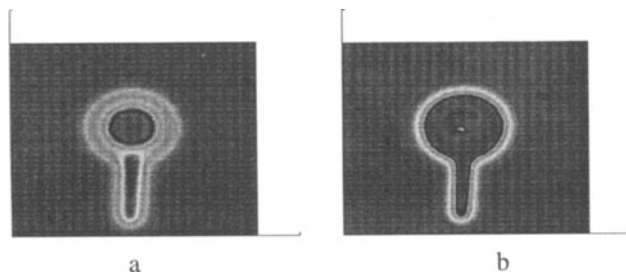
Single rivet with EDM notch cracks a) imaginary, b) real.
